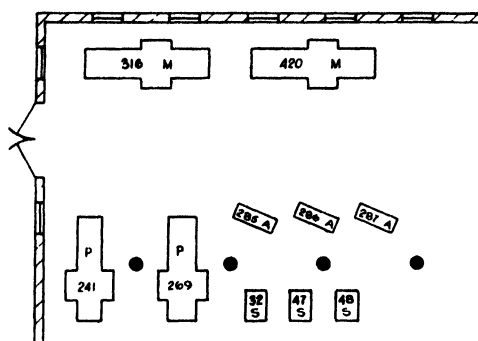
BLOCK PLAN TO DEPICT MACHINE TOOL LAYOUT
